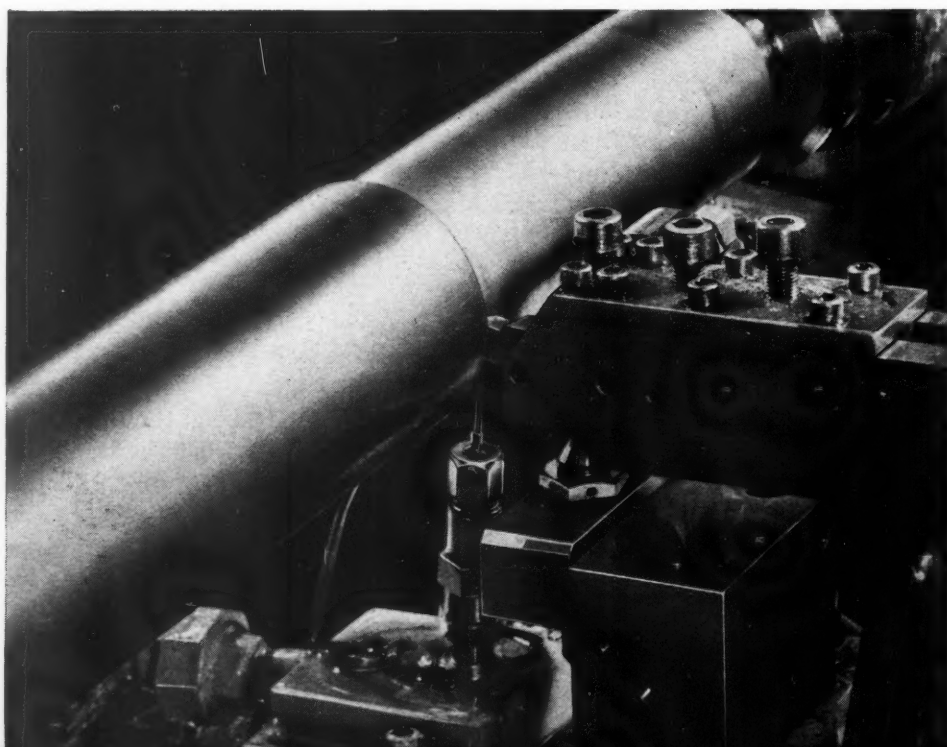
High-speed jets of oil, directed on the cutting edge of the tool from below, efficiently cool and lubricate the tool
